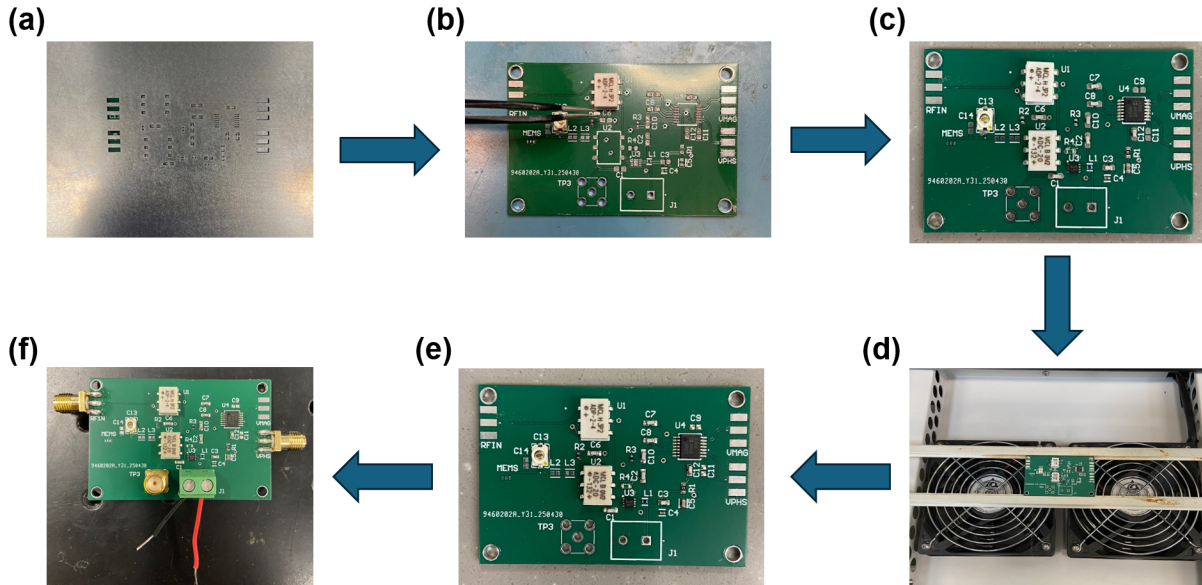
PCB soldering process (a) Place stencil on board and apply solder paste (b) Place components on pads (c) Inspect components (d) Place PCB into reflow oven with configured profile (e) Inspect soldered board (f) Solder through-hole components and SMA connectors.
